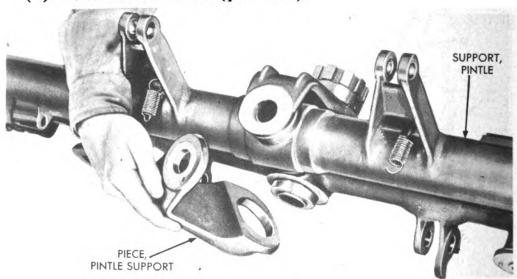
Removing the Pintle Support Piece RA PD 6958
